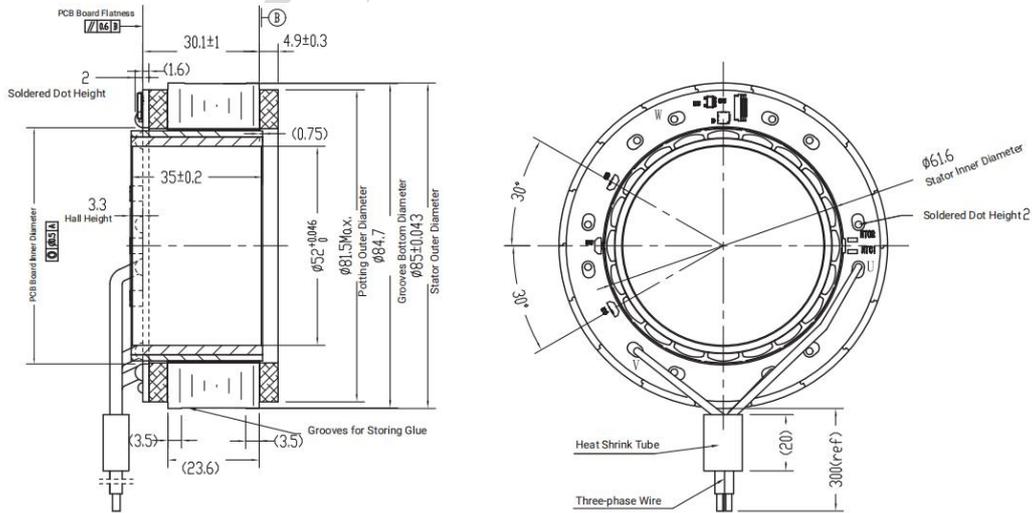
RMD-FL-85-23-750 appearance dimension drawing
